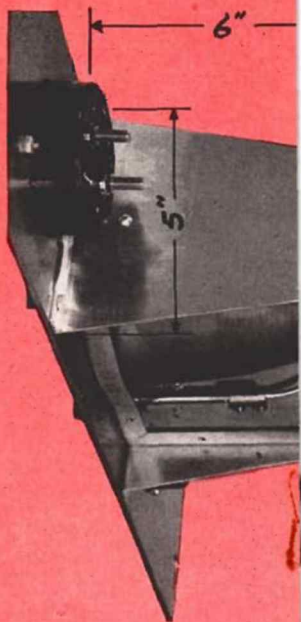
Side view showing approximate position of capacitors. Dimensions of the side bracket.
